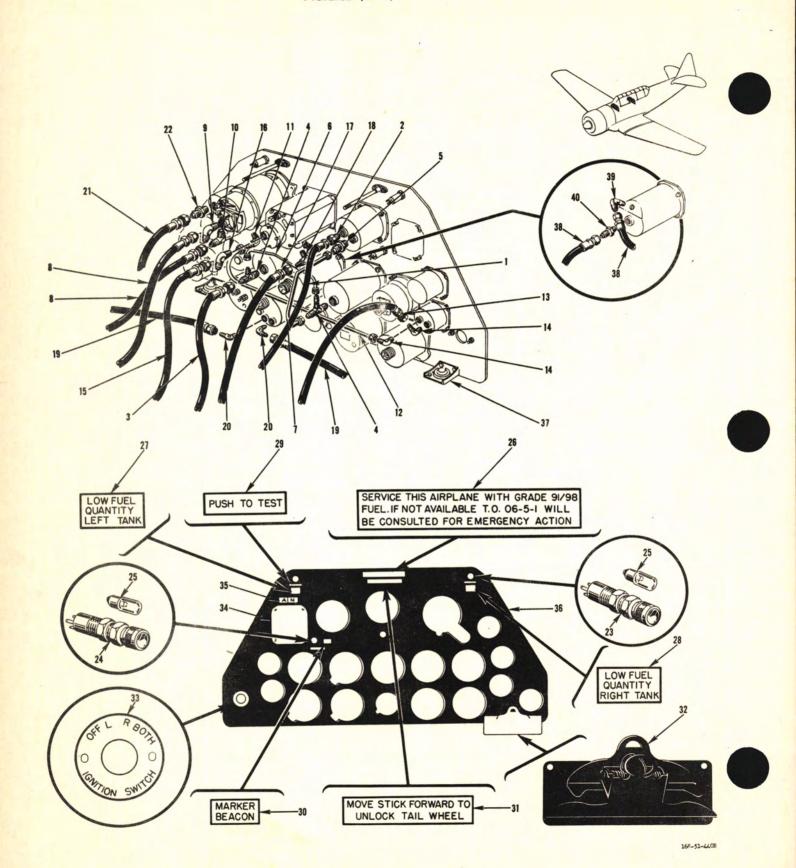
COMPLETE INSTRUMENT PANEL ASSEMBLY
